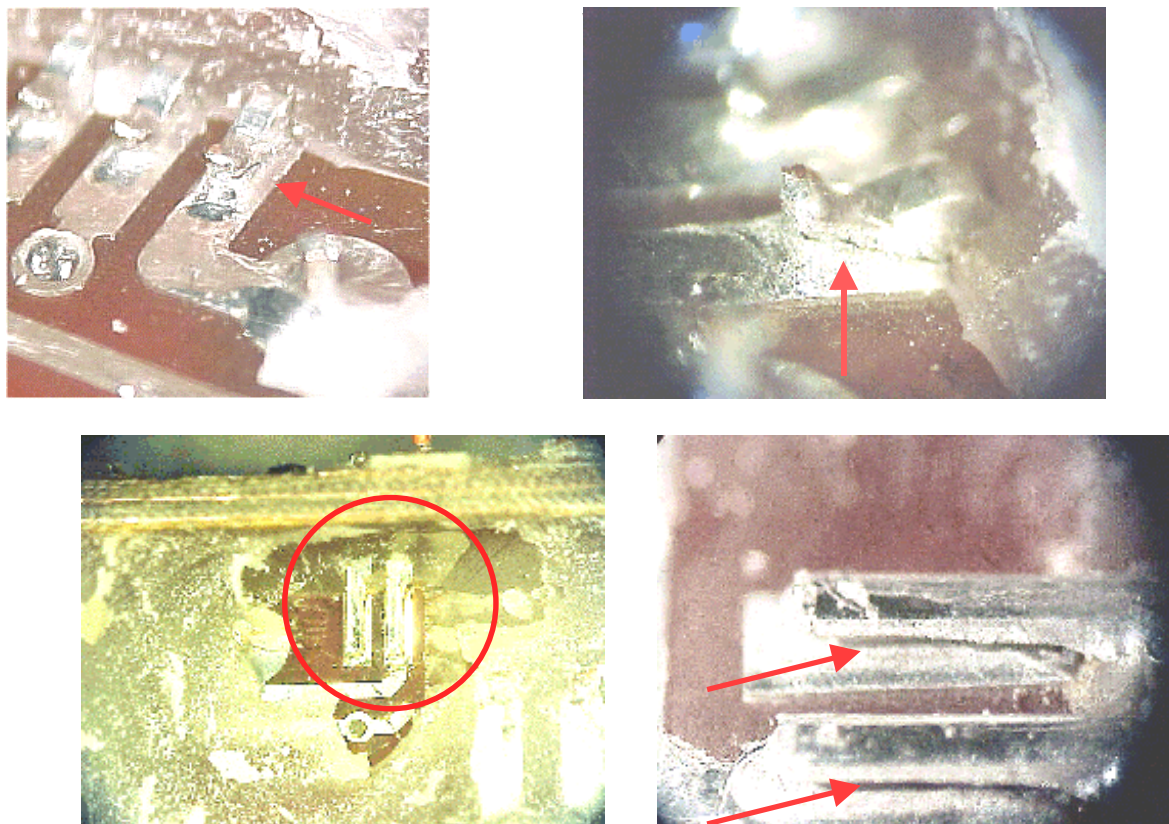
Pictures of the pads where the *fork pins* were soldered.
